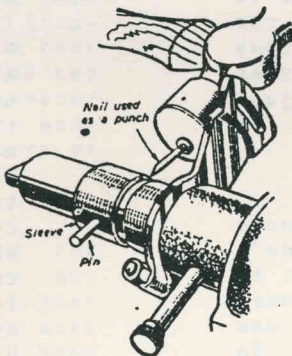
Driving out pin which secures driving sleeve on distributor spindle.
